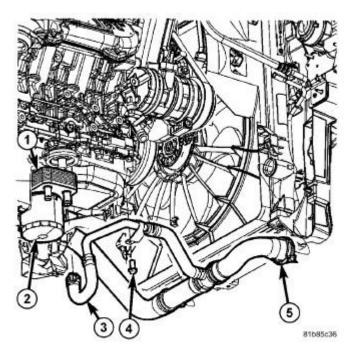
Engine Oil Cooler, Filter, Coolant Hose, Bolt & Lower Radiator Hose Courtesy of CHRYSLER LLC
